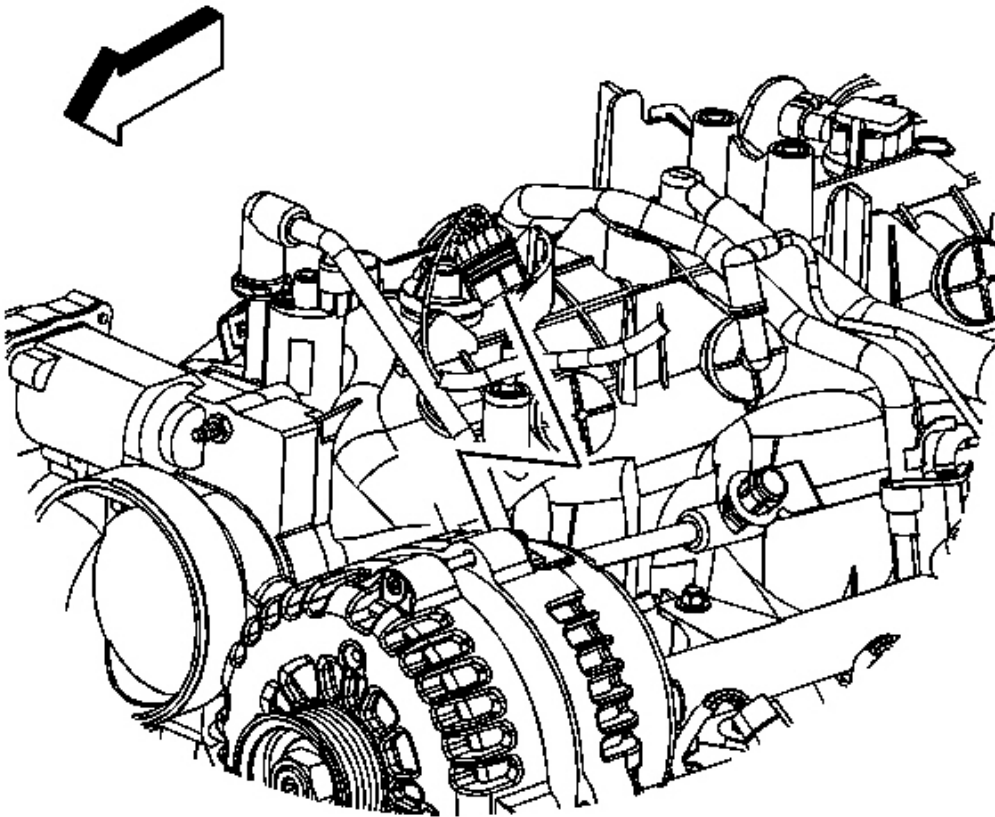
View Of Engine Wiring Harness Generator Electrical Connector
